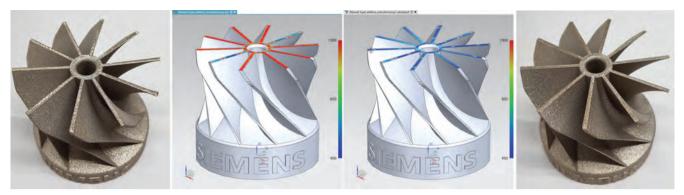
Meso-scale, physics-based simulation of powder-bed fusion manufactured parts aims to identify overheating and enable the engineer to adjust process parameters to achieve improved part quality. The impeller on the left is printed using the original file and shows evidence of local overheating, highlighted in red. The part on the right is printed using the optimized file, which shows no evidence of local overheating. *Image courtesy of Siemens Digital Industries Software.
